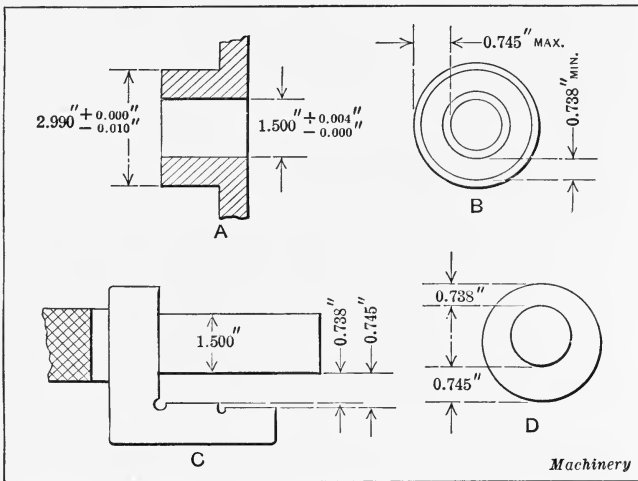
Illustration showing how Compound Tolerances are involved when testing the Concentricity of a Hub with a Hole
